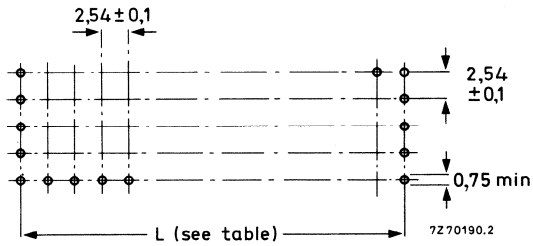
Piercing diagram for panel sockets. The hole diameter applies to plated-through holes.
